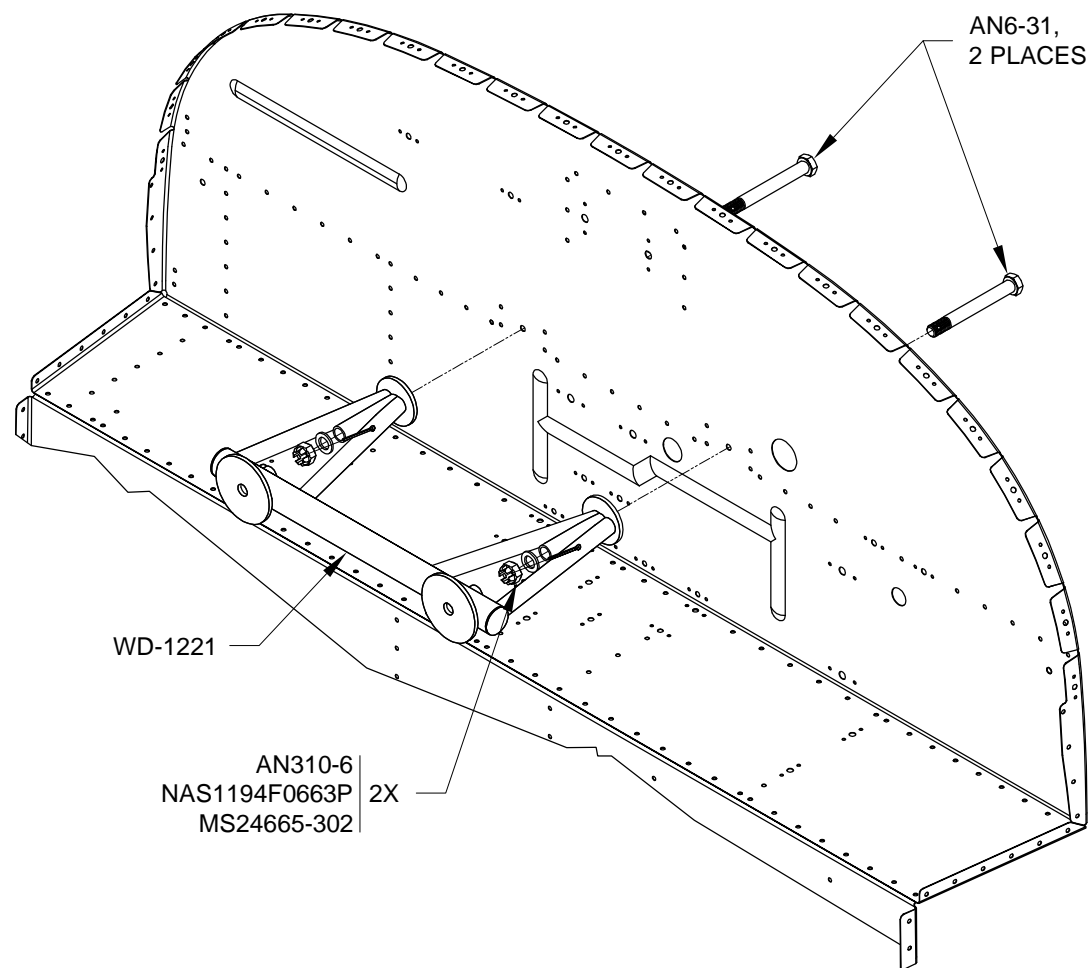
ATTACHING THE ENGINE MOUNT STANDOFF
